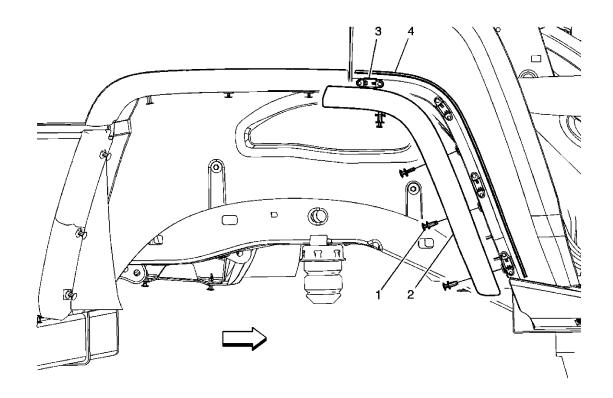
Identifying Rear Wheel Opening Flare (Rear Door w/BRM & RHD) Courtesy of GENERAL MOTORS CORP.
